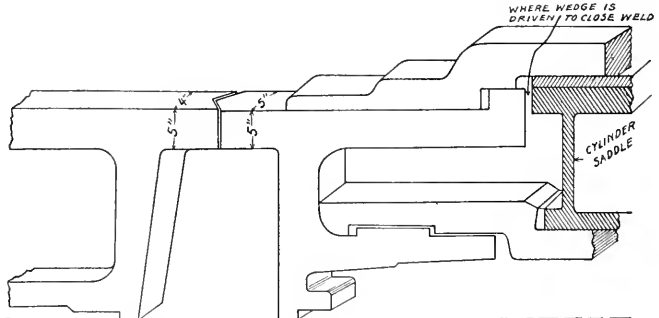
FRAME CUT THROUGH JAWS AND FRONT PART REMOVED.
